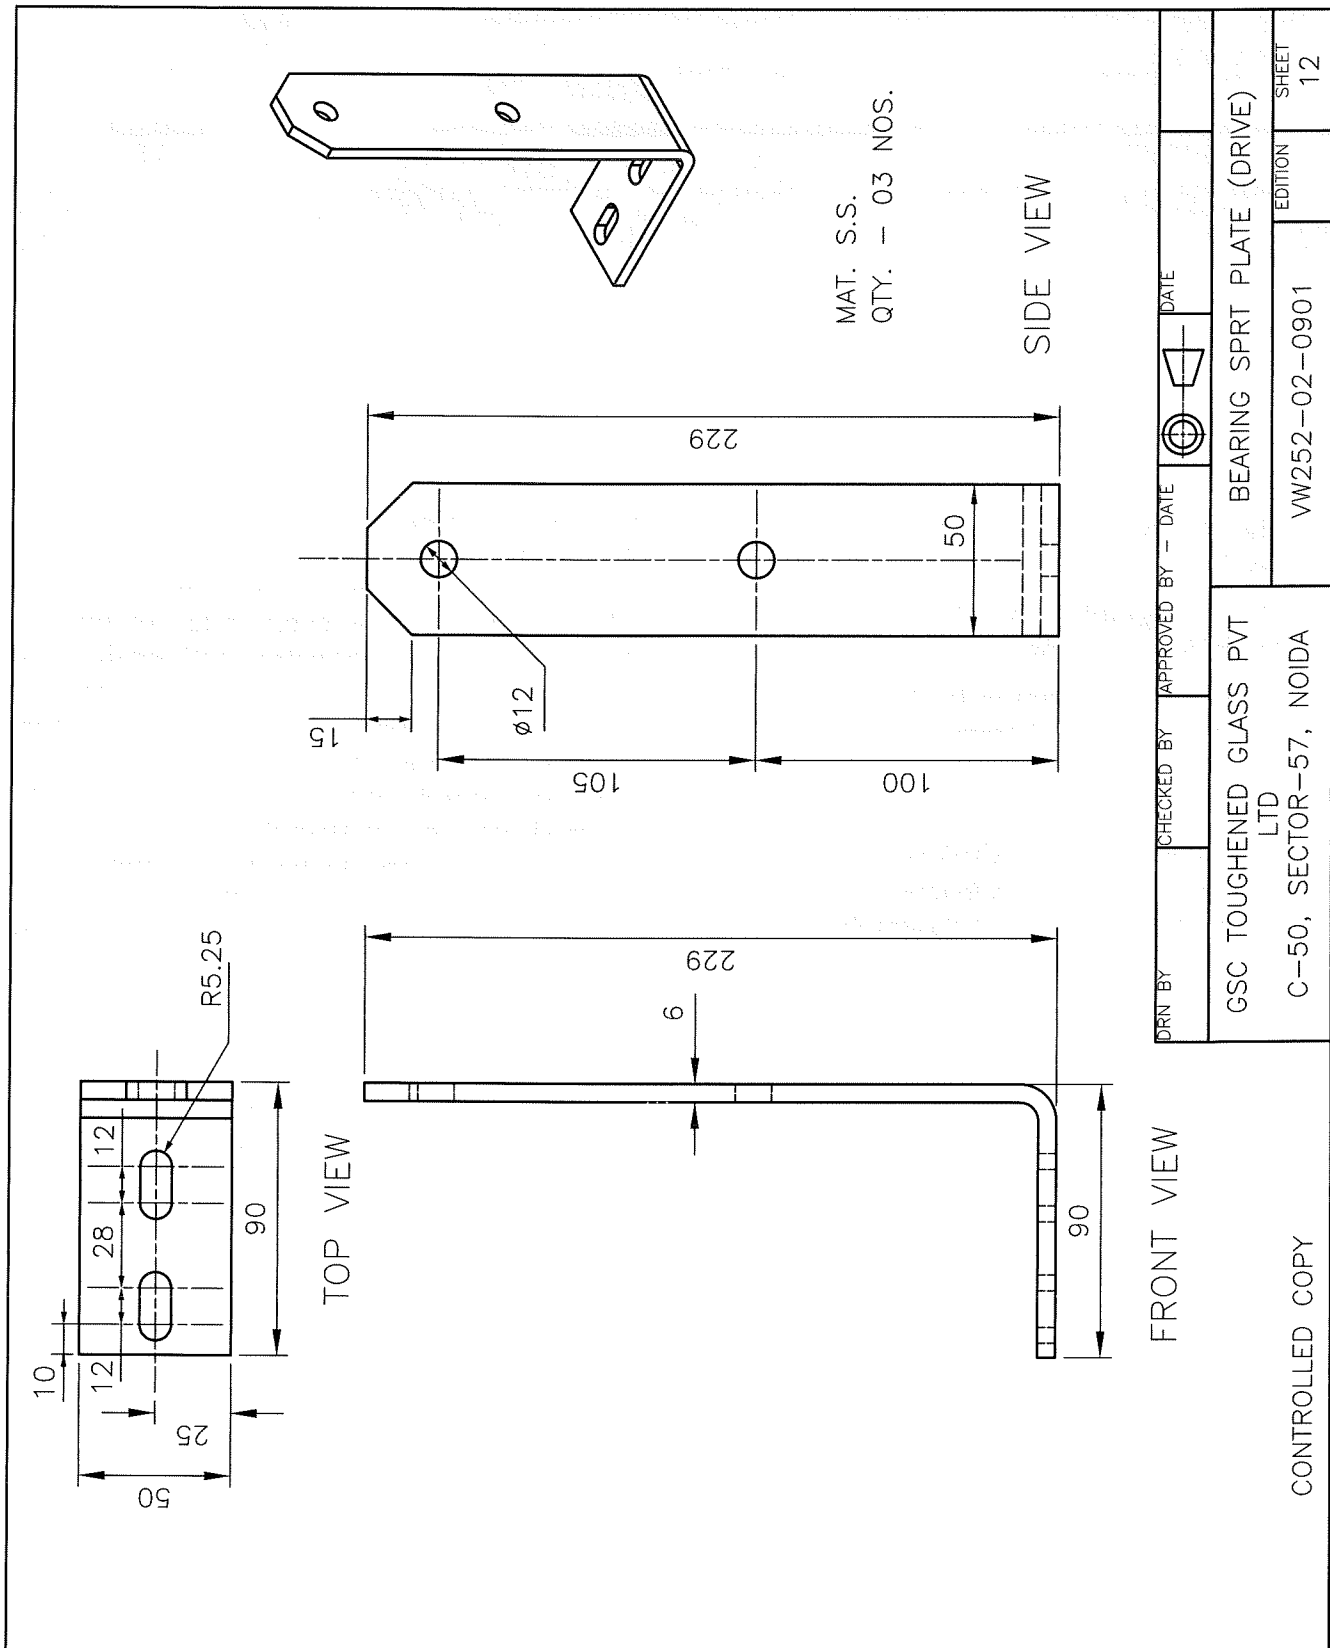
Multiview drawings explain three-dimensional objects in two dimensions. (Autodesk, Inc.)
